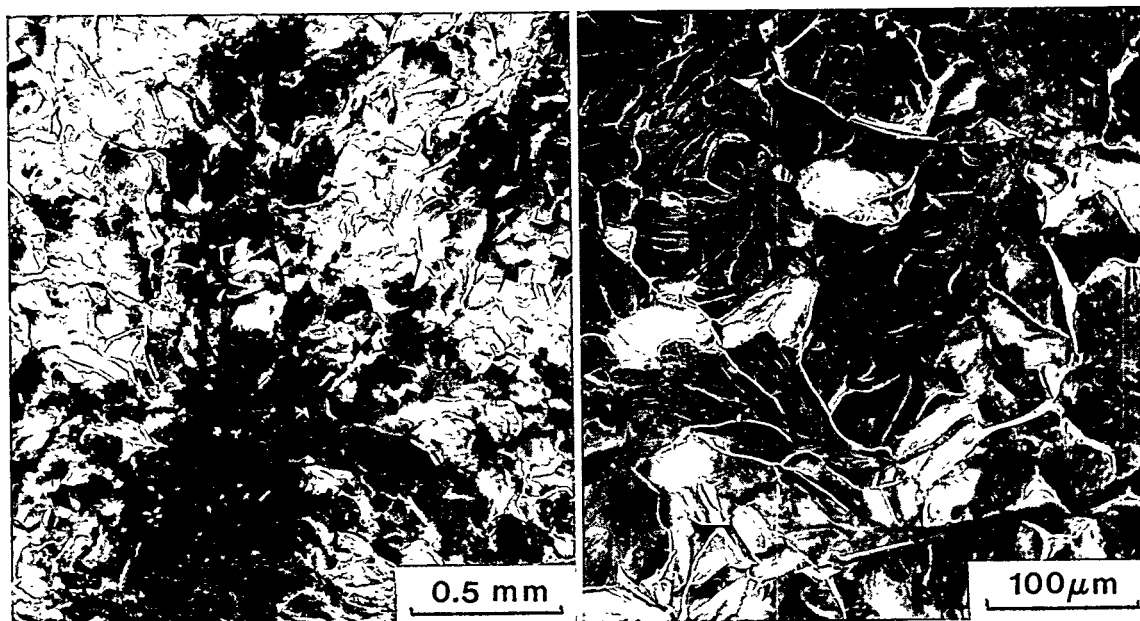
Fractography for second heat of FAP-Y. Left: low magnification view of Charpy specimen tested at 150°C. Note the many particles on the fracture surface. Left: higher magnification showing cleavage fracture.
